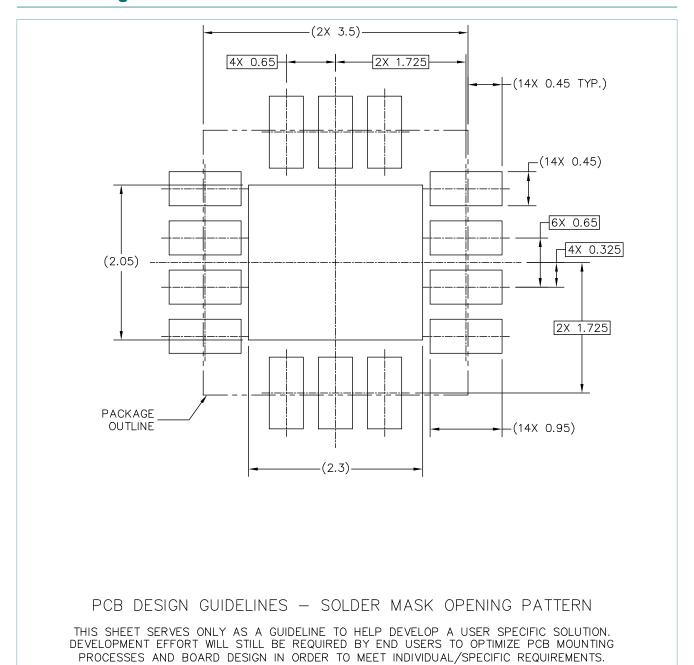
Reflow soldering footprint for HX2QFN14 (SOT1936-1)
